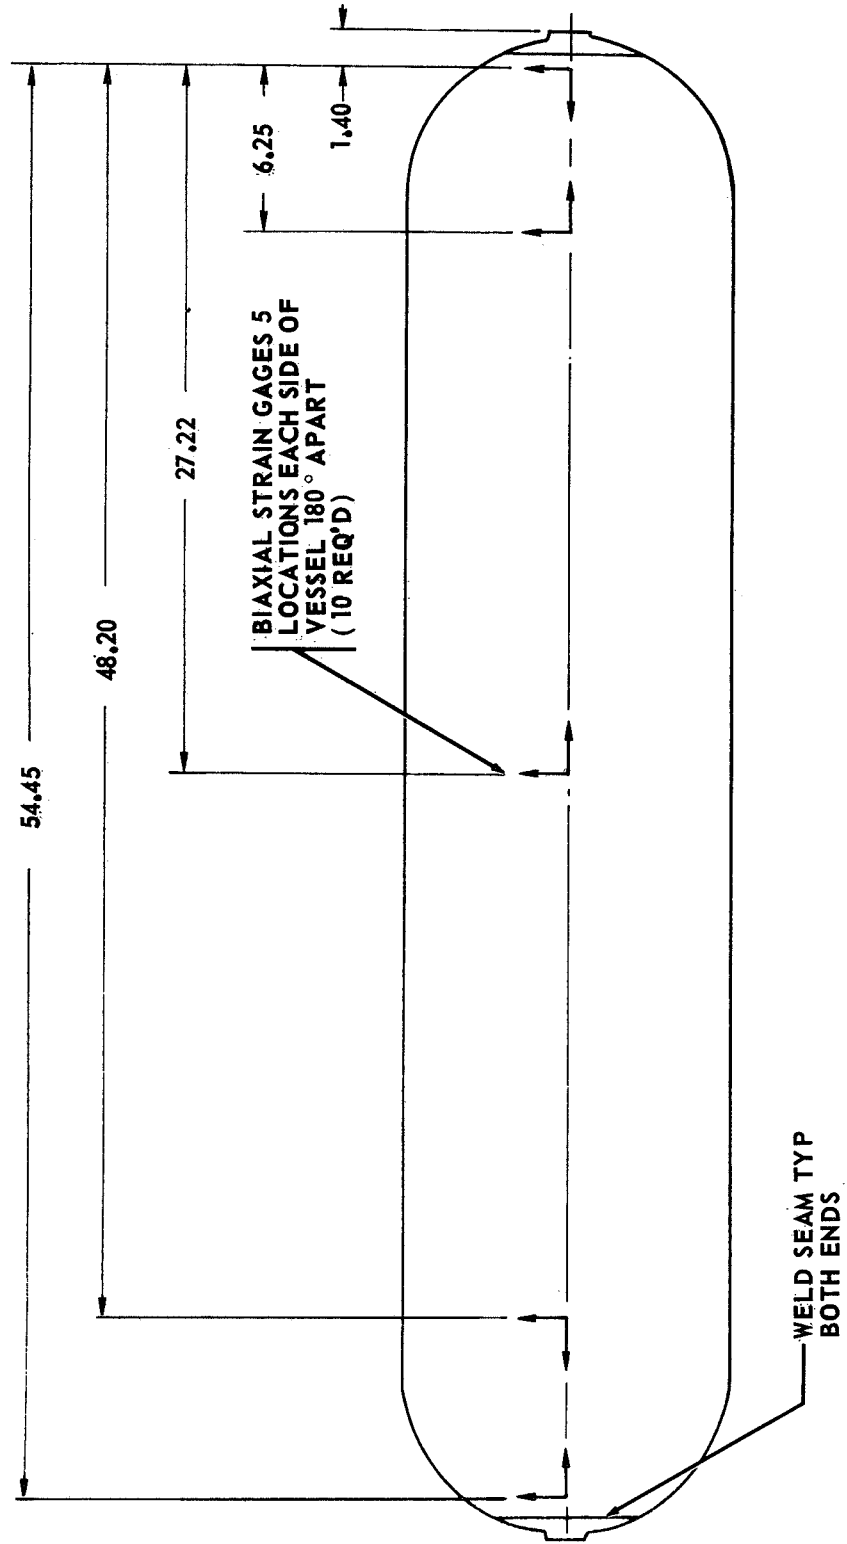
Strain gage locations for integral head pressure vessel S/N US-2.
